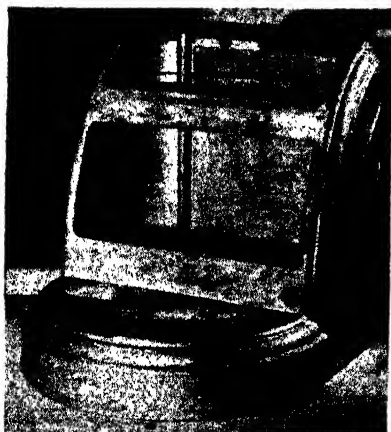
This die-cast display housing was employed in preference to a molding because more than one molding die would have been needed to secure as rapid production as in a single-cavity casting die, and this made total die cost for molding too high.
